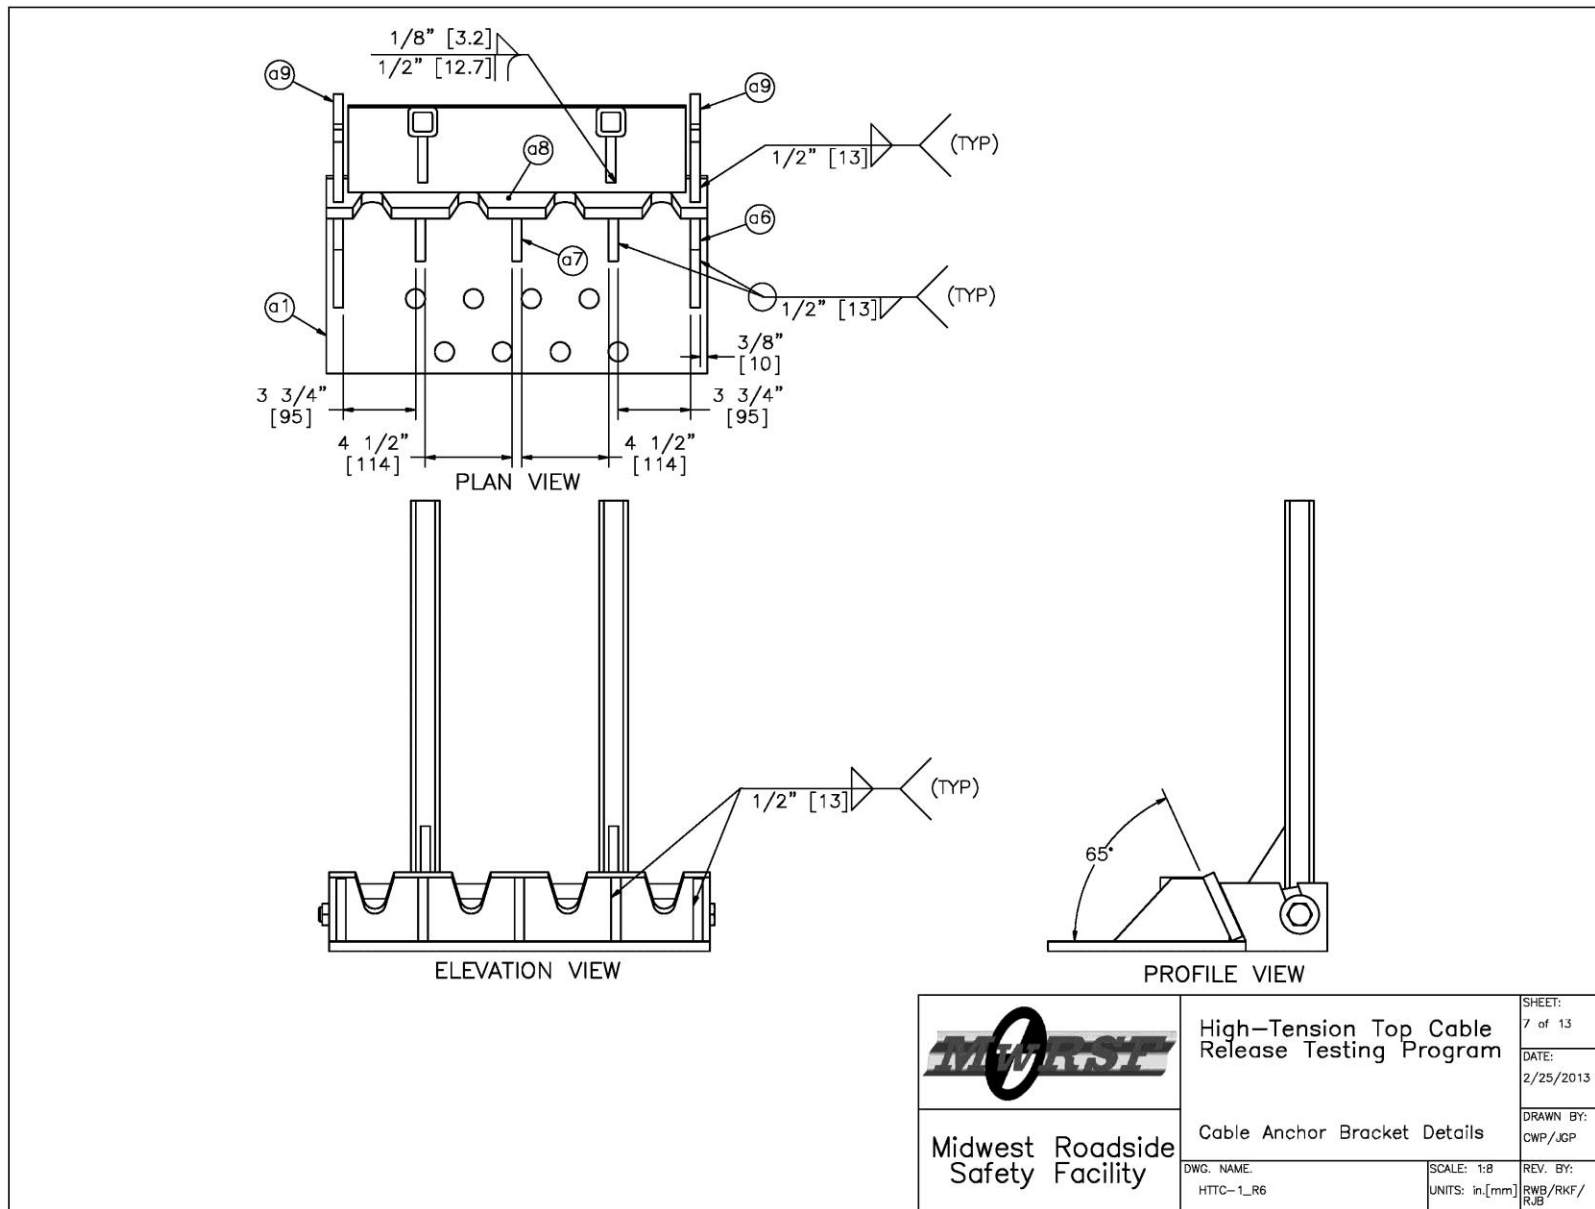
Cable Anchor Bracket Details, Test No. HTTC-1
